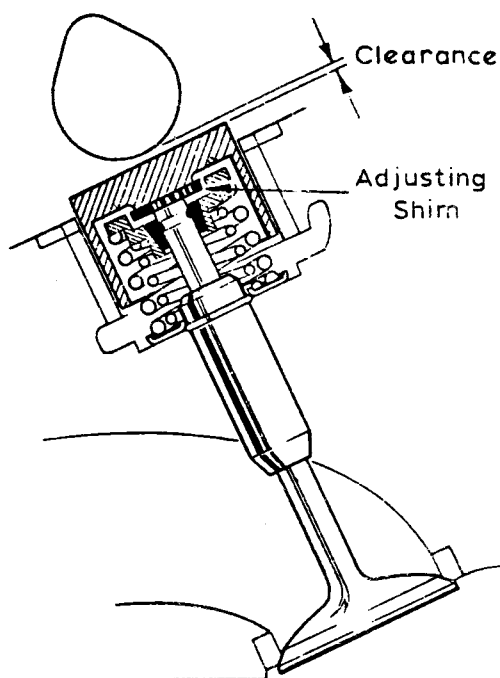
VALVE ADJUSTMENT TD-50-4E
